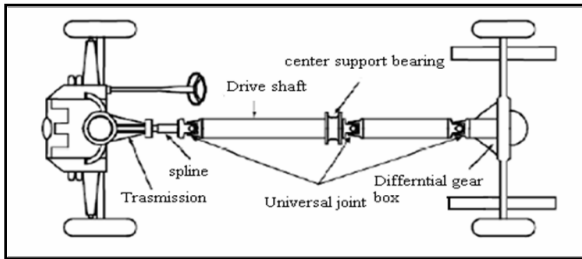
Conventional two-piece steel drive shaft for a rear wheel drive vehicle
